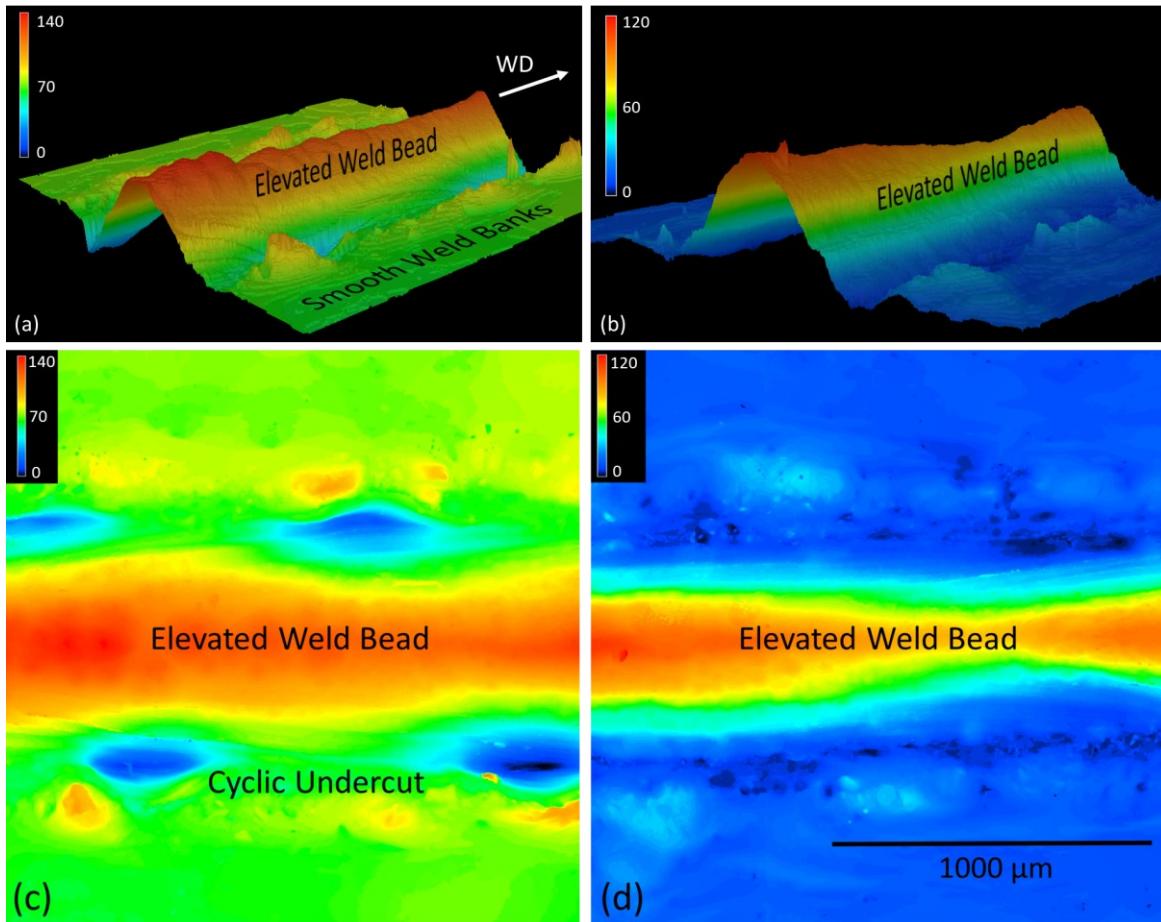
3D laser profile of the (a) top and (b) bottom surfaces of the weld in the LBC showing a weld profile that is free of any serious concavity or undercut defects. In fact, the 3D profiles of the weld suggest that the fluid flow generated in this beam configuration is such that more molten material is deposited and retained in the molten weld seam which causes the weld bead to have a convex profile at the top and bottom surfaces. Despite this accumulation of excess material in the weld bead, very minimal undercut was observed at the top surface ($< 30 \mu\text{m}$) and no undercut was observed at the bottom. 2D height maps of the (c) top and (d) bottom surfaces of the weld in the LBC showing the elevated weld beads with some cyclic undercut at the top surface and no surface defects at the bottom surface. Color scale bars have a unit of μm . (WD: Welding Direction)
